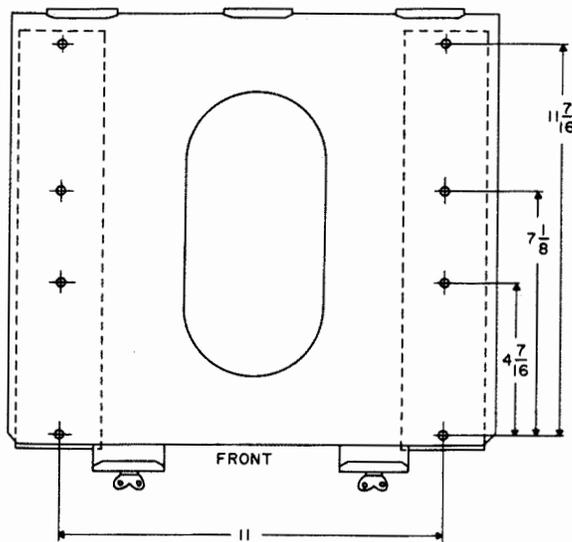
Non-Tactical Case CY-2977/UG or CY-2977A/UG, Shock Mounted Installation, Mounting Holes Location
